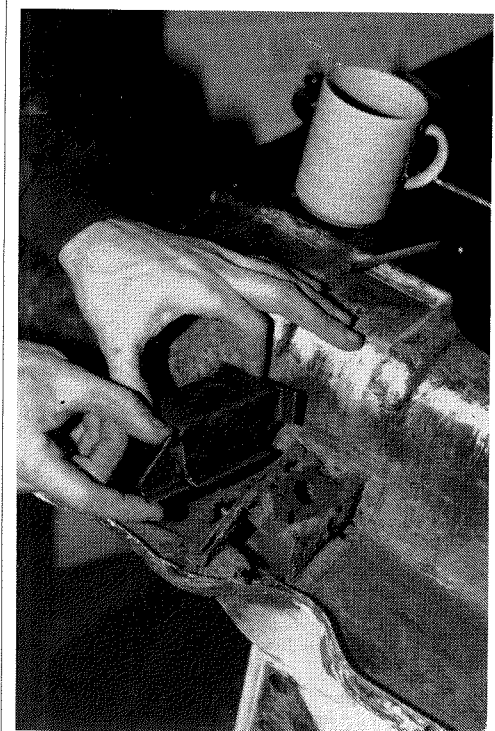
If necessary a left hand bracket can be modified to right hand by cutting off the extension, reverse bending the foot...
